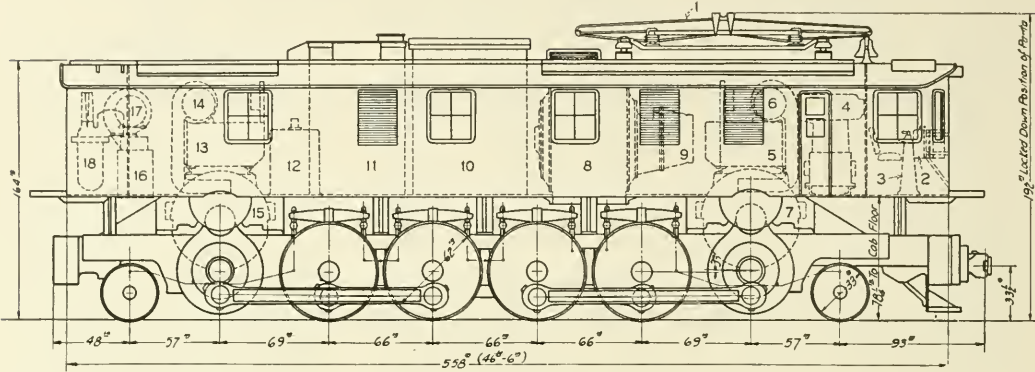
LINE DRAWING OF ONE UNIT OF LOCOMOTIVE
